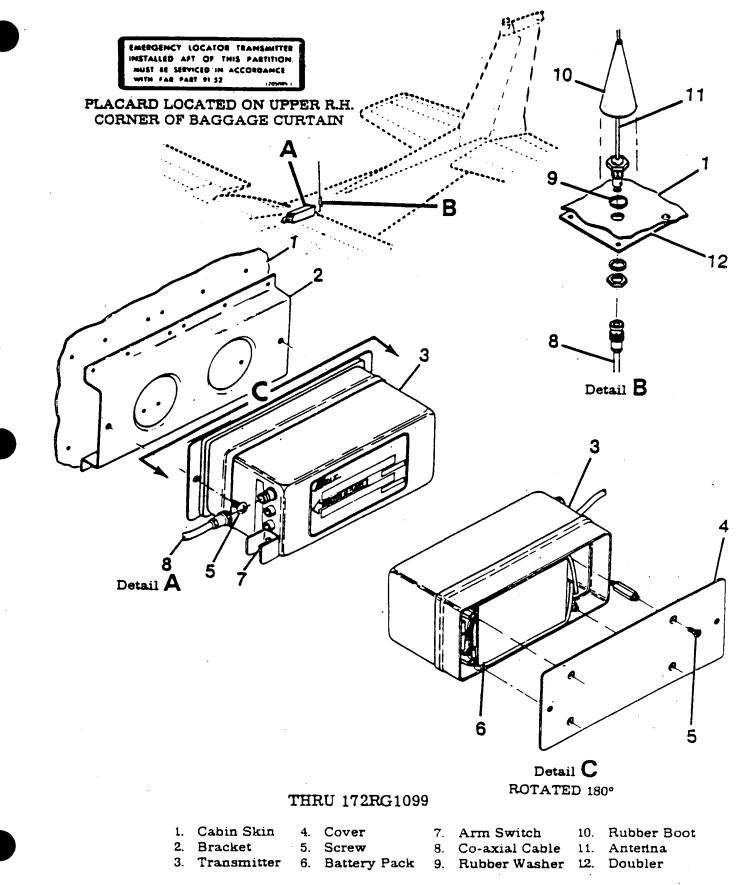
Emergency Locator Transmitter Installation (Sheet 1 of 2)
